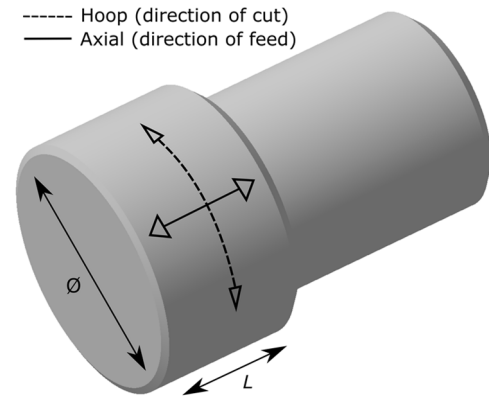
Shape of the manufactured workpieces. The diameter is 35 mm and the length  $L$  of the surface to be machined is 20 mm. The figure also shows the axial and hoop directions of measured residual stresses.
